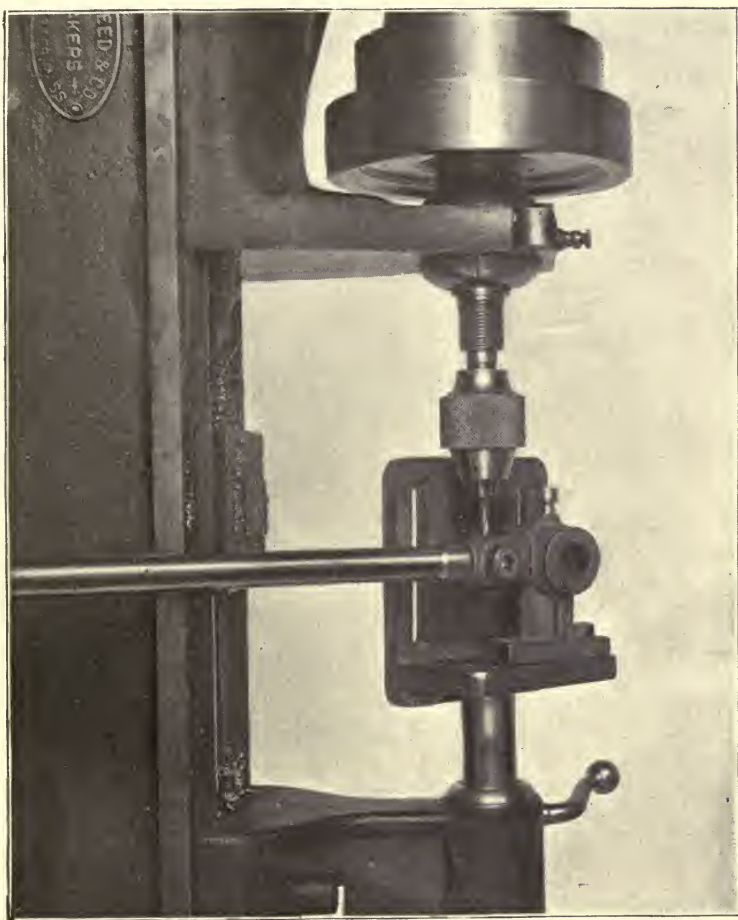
DRILLING MAIN BEARING AND SIDE ROD FOR KEY.
